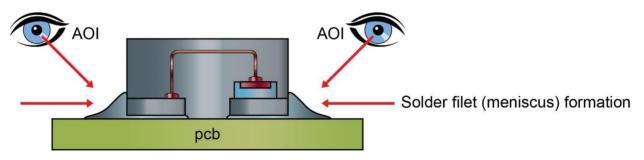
AOI enabled DFN package with Side Wettable Flanks (SWF)
